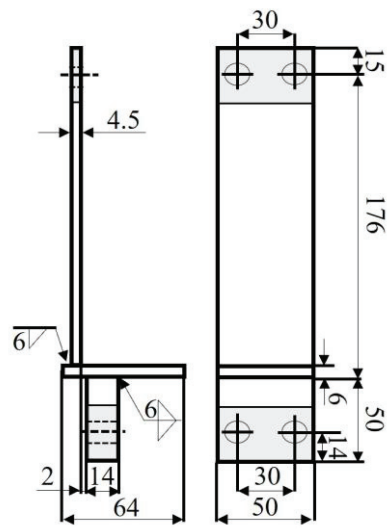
Shapes and dimensions of specimens (unit : mm)
